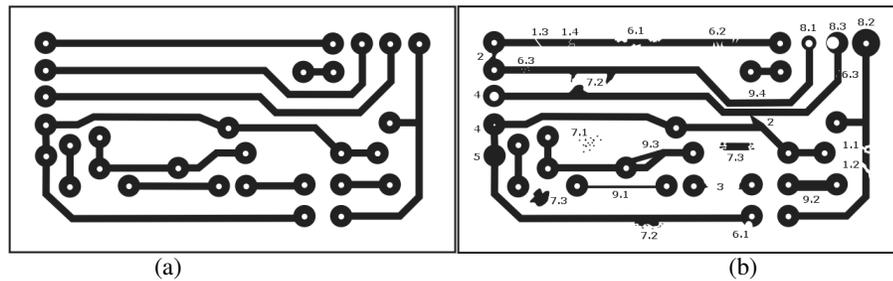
PCB schema without errors (a). PCB schema with errors (b).
